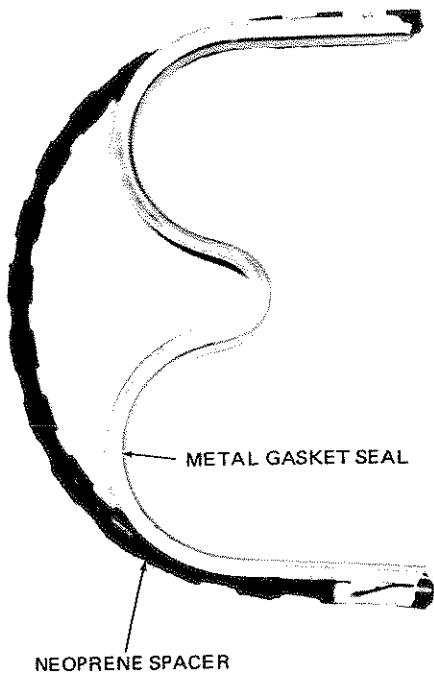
Hydraulic Pump Repairs (Sheet 1 of 2)
